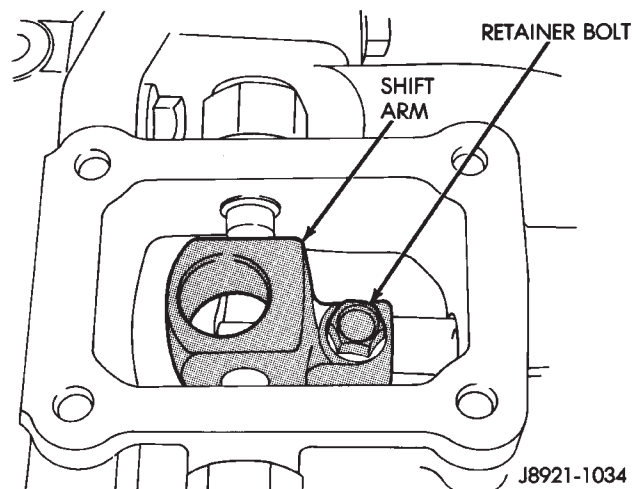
Shift Arm Retainer Bolt Removal/Installation
